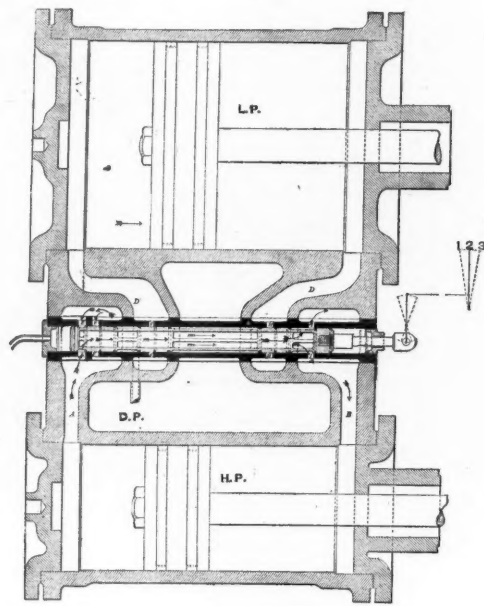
Cylinders and Starting Valve; Starting Valve Open and Cylinder Cocks Closed.
